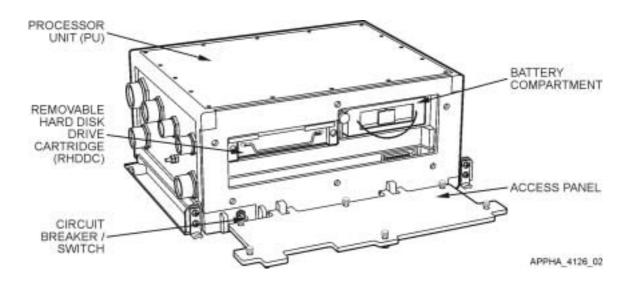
Processor Unit (NSN 7021-01-475-0217/NSN 7021-01-487-0579/NSN 7021-01-496-2126)
